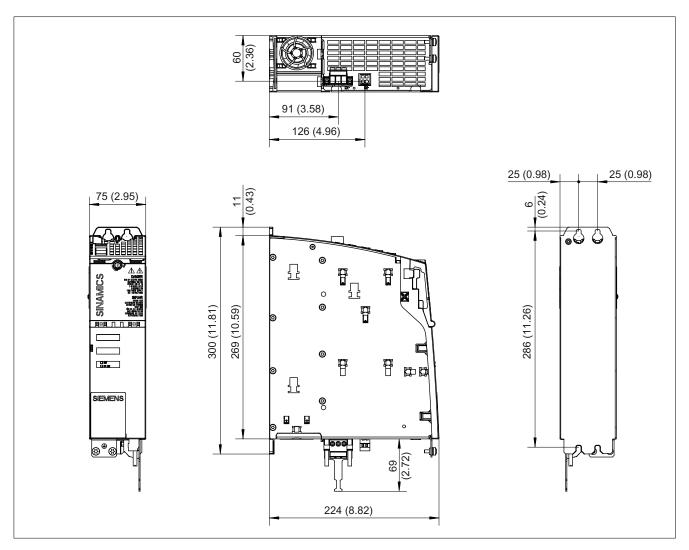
Dimension drawing of 18 A Motor Module Booksize Compact, all dimensions in mm and (inches)
